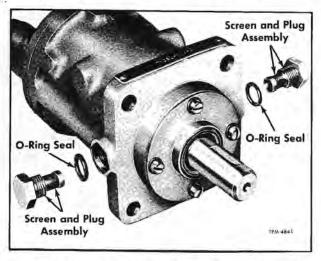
Motor Oil Strainer Plugs and Screens Removed
